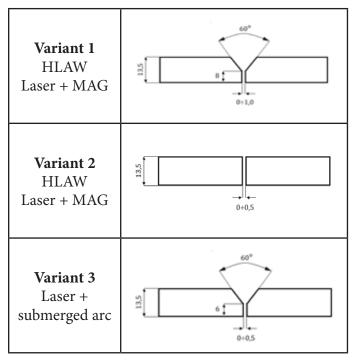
Pre-weld matching and preparation of the test plates in the 3 variants
